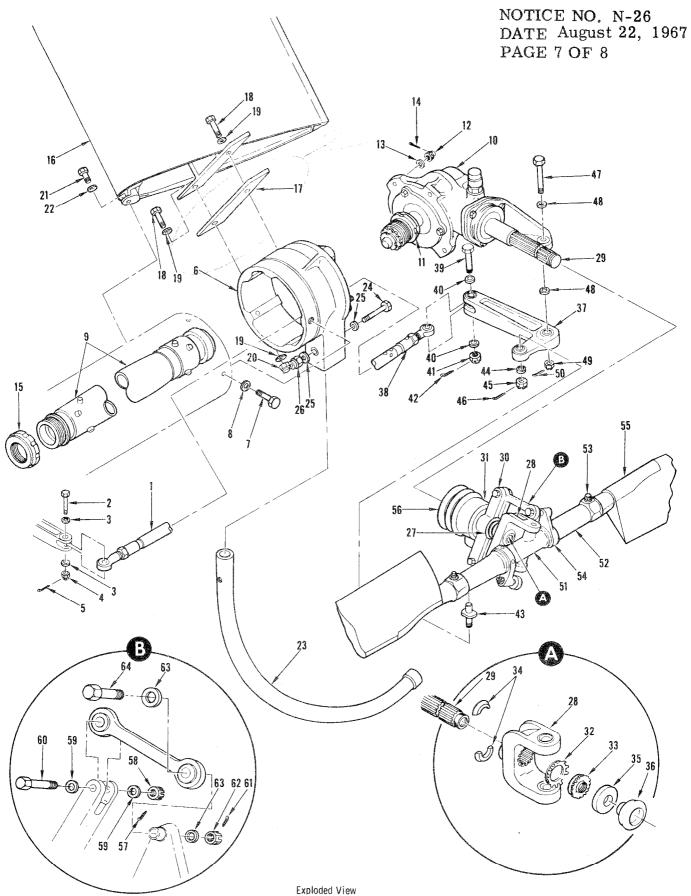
Low Tip Speed Tail Rotor Assembly
